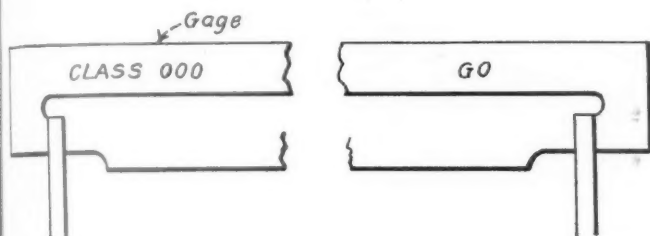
Solid Gage Used to Measure the Limits When Making New or Repairing Old Piston Valve Spools
